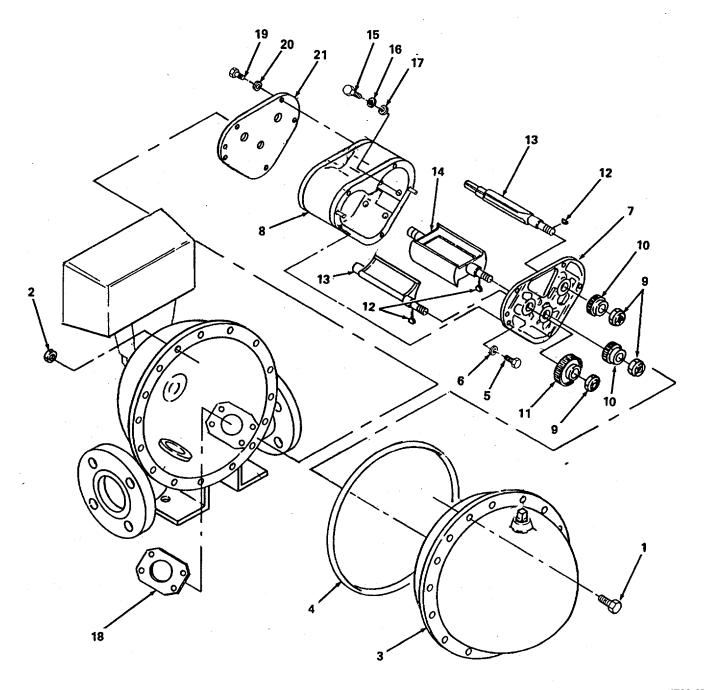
Flow Meter Metering Chamber Disassembly.
